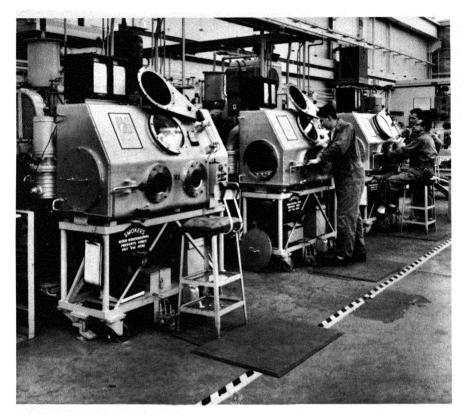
Hermetically sealed welding chambers.
